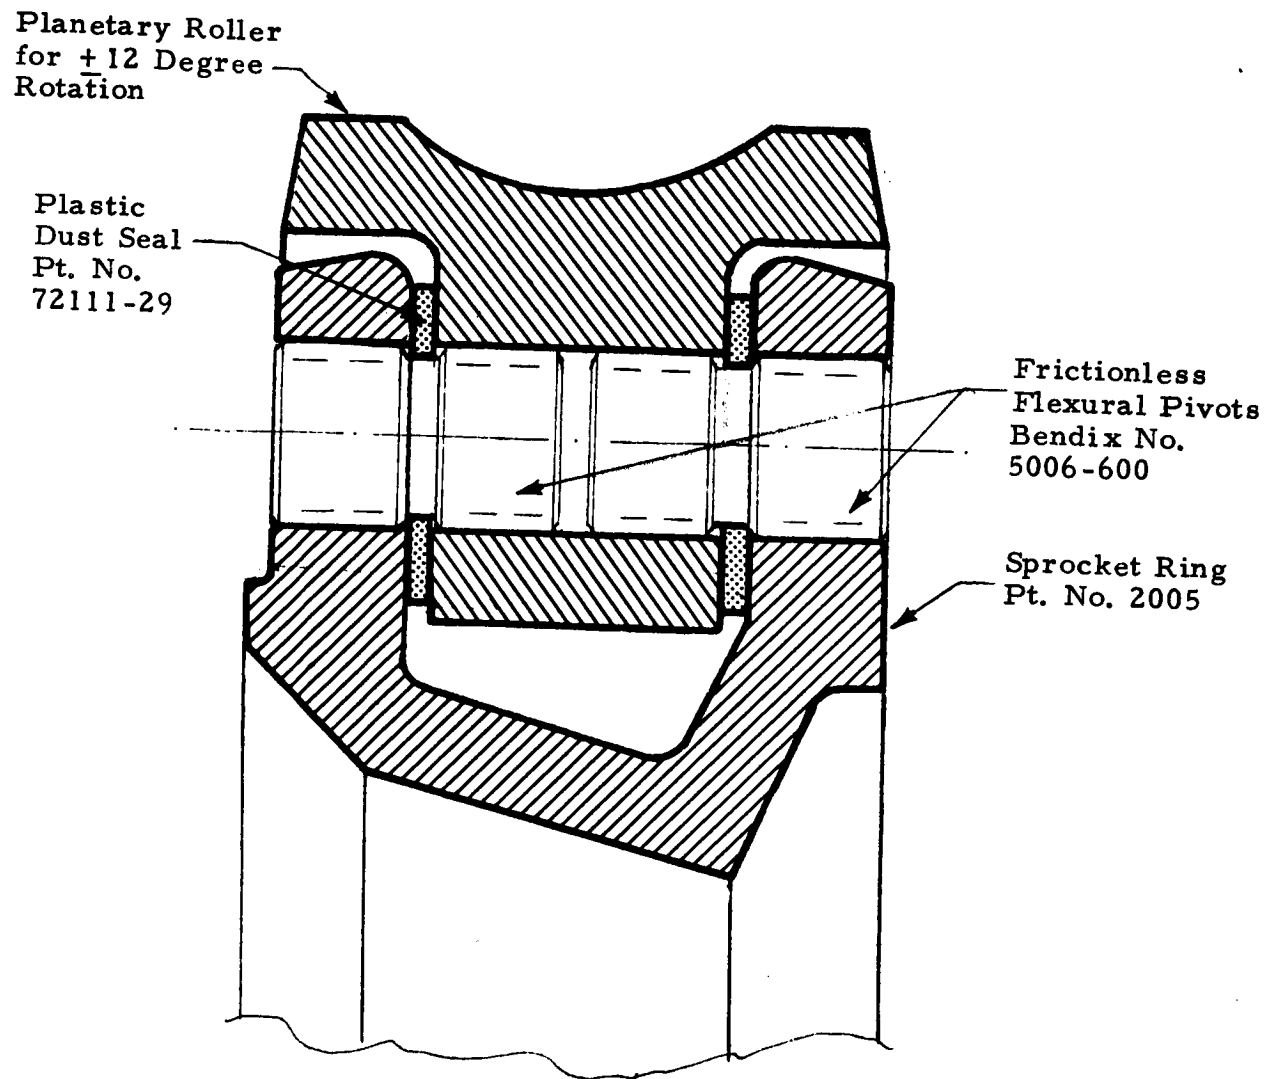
Detailed View of Planetary Roller, Frictionless Bearing, and Dust Seal Installation
